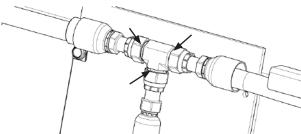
Check T Fittings On Front Side of Struts for Leaks
